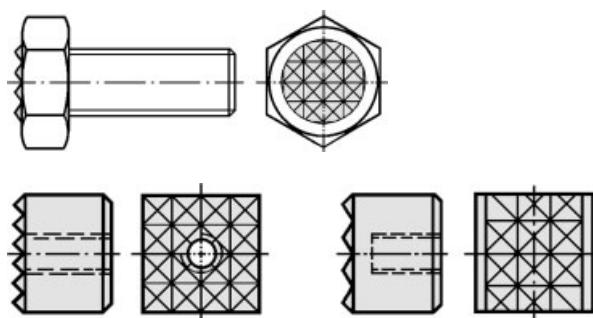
Gripper jaw screw and clamping tip attachments
